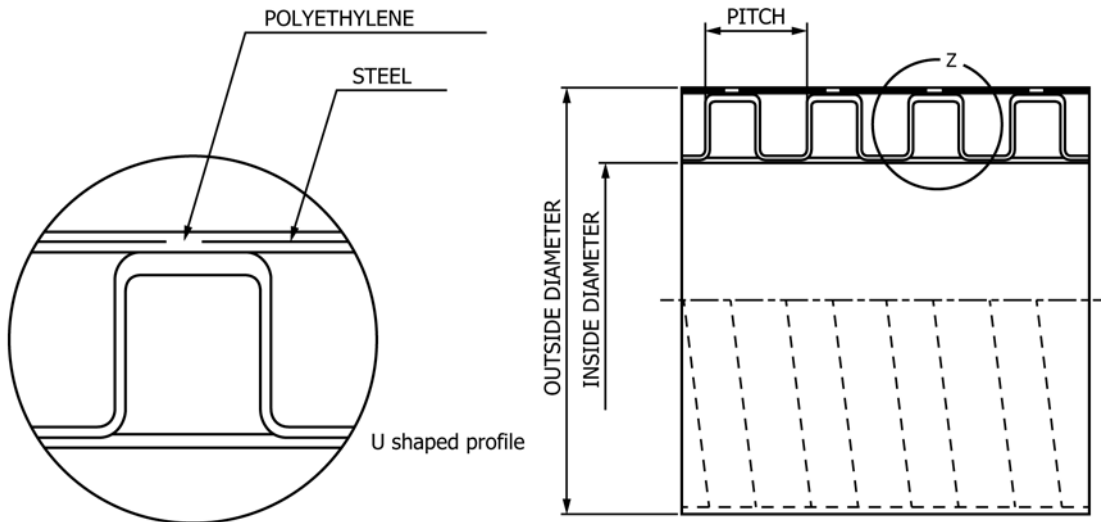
Triple-Wall Steel Reinforced Corrugated Polyethylene Pipe – Type IIB
